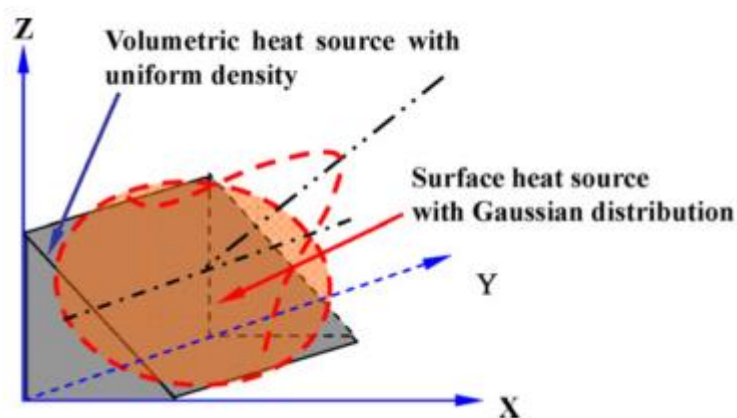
Combined heat source in the fillet welding joint (Deng, Liang & Murakawa 2007)
